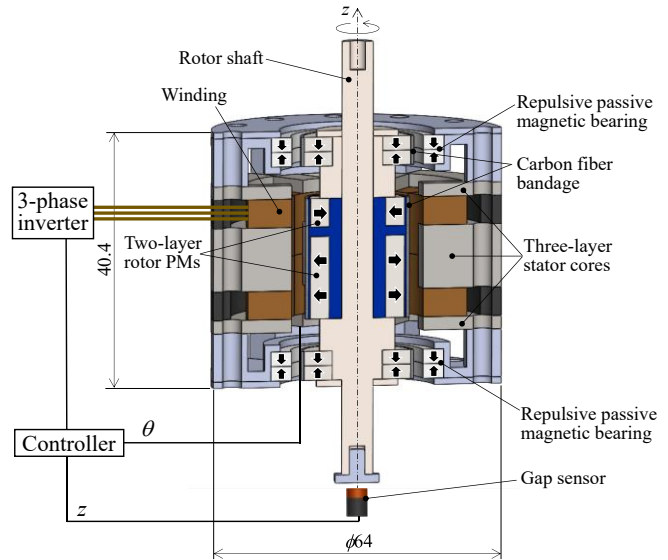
Cut view of 1DOF single-drive bearingless motor.
